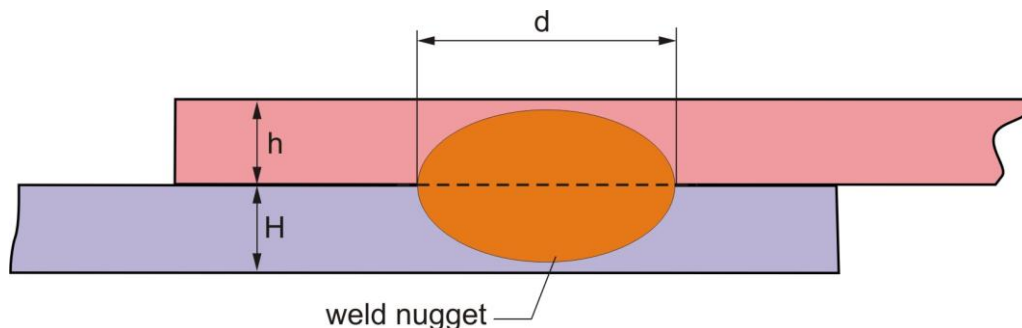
The geometry of the overlap spot-welded joint
